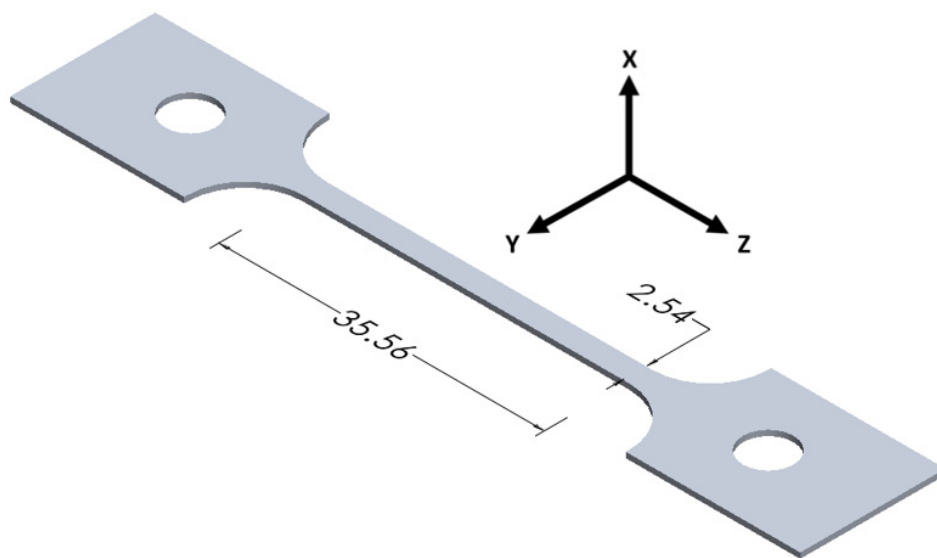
Isometric view of a creep specimen. All dimensions are in mm.
